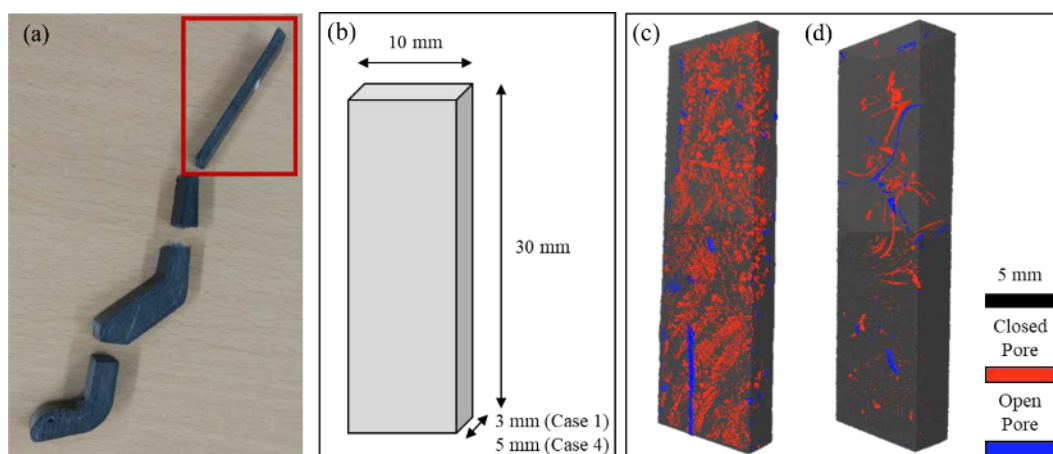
(Color online) (a) Photograph of the sectioned parts from the produced wheel rim. (b) Dimensional details of the specimen for Micro-CT. Images of voids in the wheel rim: (c) for Case 1 and (d) for Case 4.
